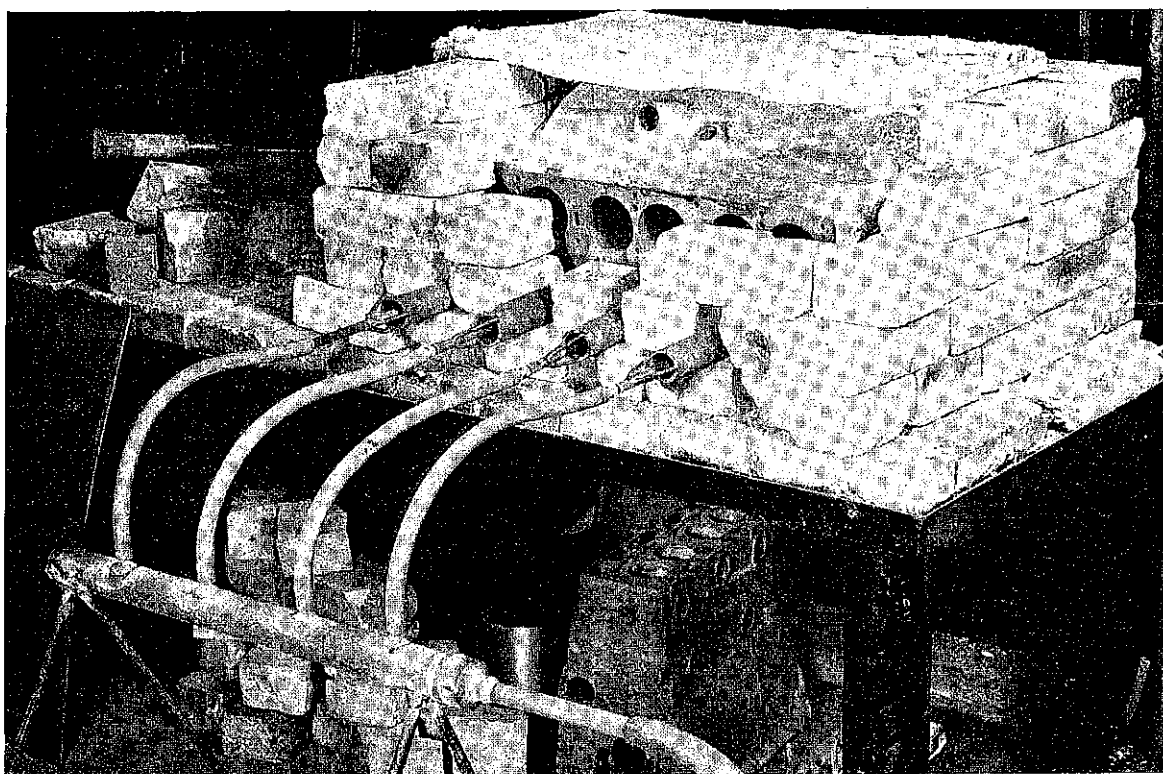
PRE-HEATING FURNACE PARTIALLY BUILT UP FOR WELDING OF CAST-IRON CYLINDER BLOCK.
